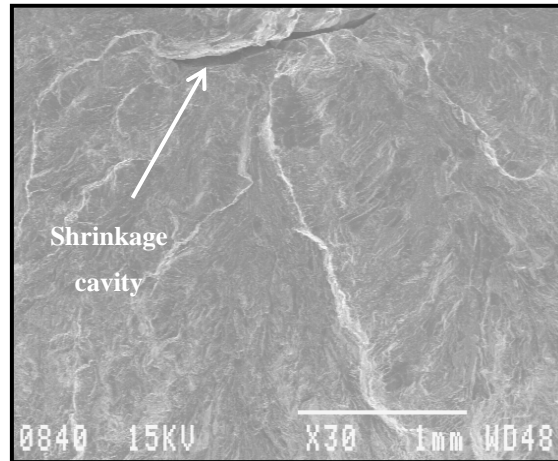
Fracture surface of SSM A357-T6 specimen; crack initiated from a shrinkage cavity.
